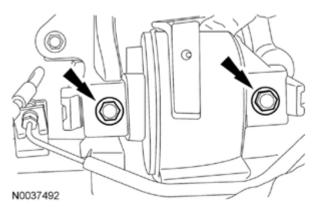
Locating Transaxle Mount Bolts Courtesy of FORD MOTOR CO.
